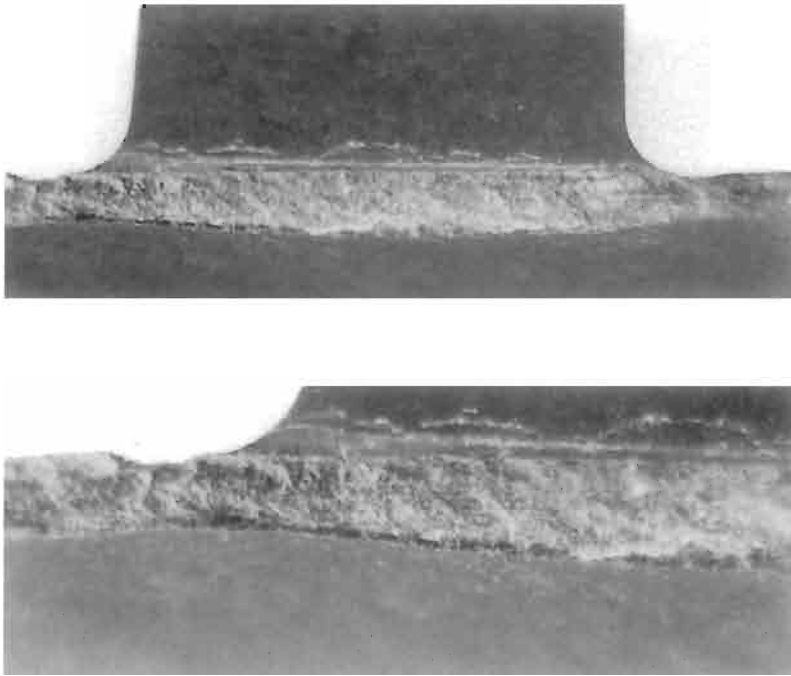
Close-ups of main crack near buttress corner. Note lower edge shows what appears to be a weld line running into the bulk material.
